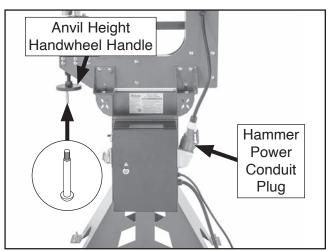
Anvil height handwheel handle installed and hammer power conduit connected.
